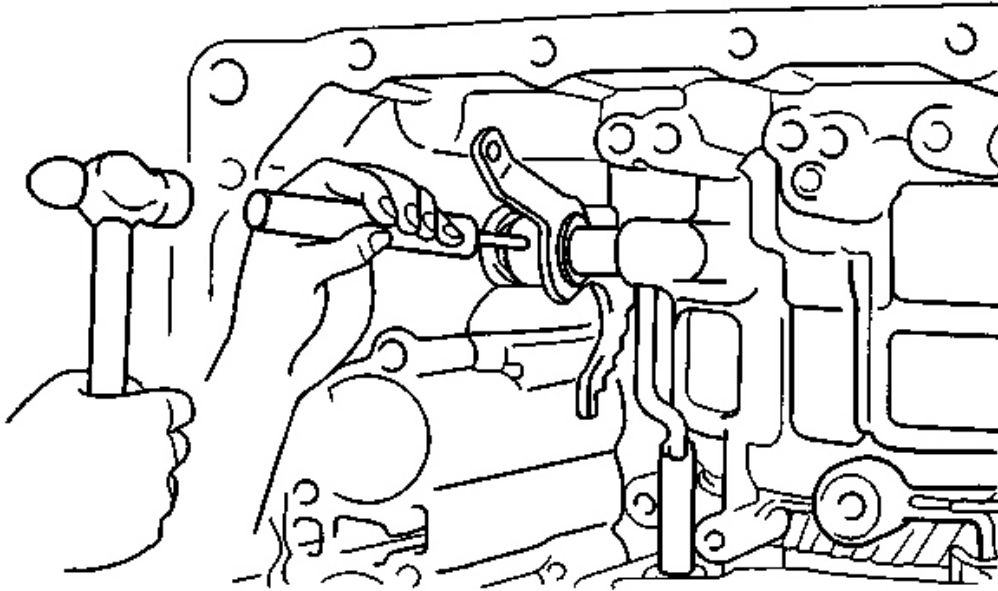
Driving The Pin Using A Pin Punch & Hammer
